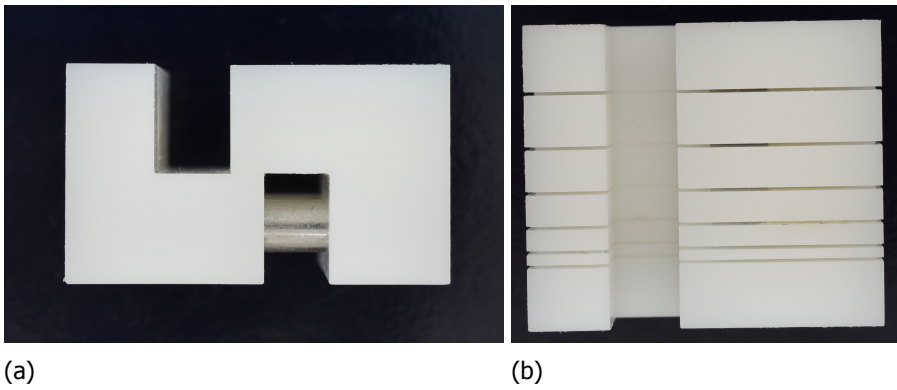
The trimming fixture used to cut the sample to the desired height. Available dimensions were 1mm, 2mm, 3mm, 4mm and 5mm. (a) Sideview of the trimming fixture. (b) Topview of the trimming fixture.
